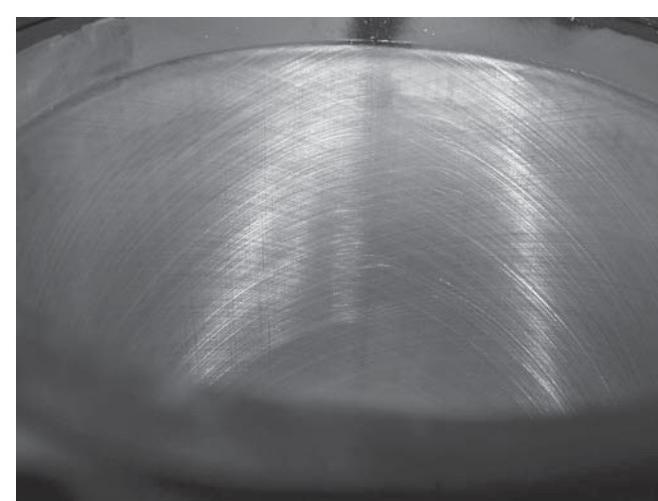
Cylinder crosshatch on a Volvo D16 after machining.
